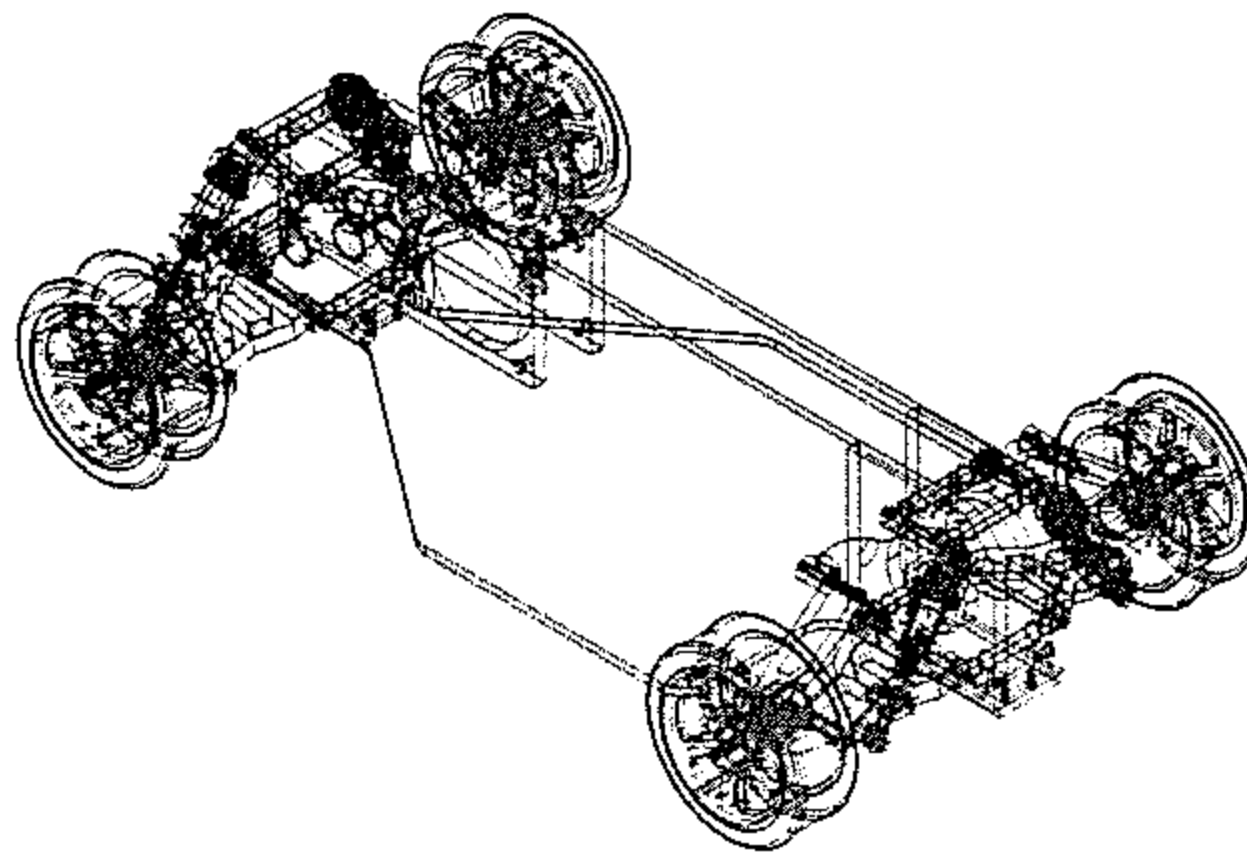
Assembly of the solid parts of a 1/10 scale model car
